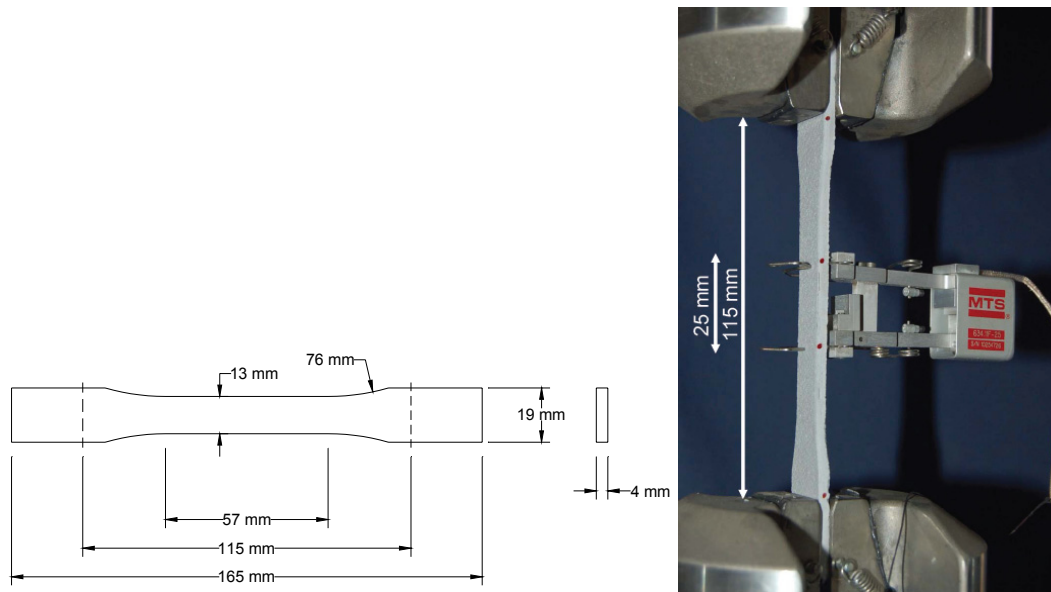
a) Specimen dimensions according to ASTM-D638; b) Experimental set-up
